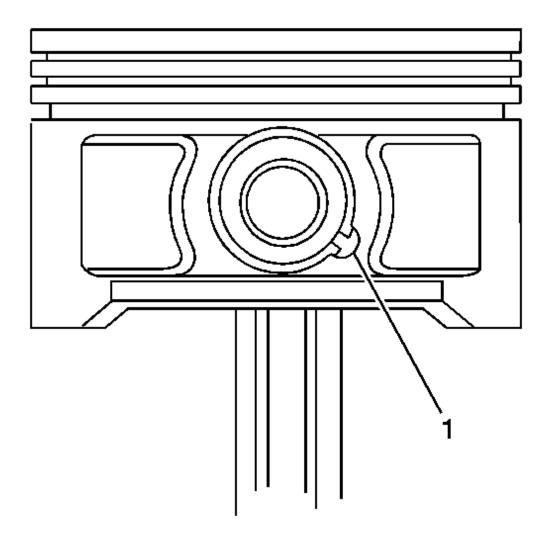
View Of Piston Pin Retaining Clip & Cutout Area Of Pin Bore Courtesy of GENERAL MOTORS CORP.
